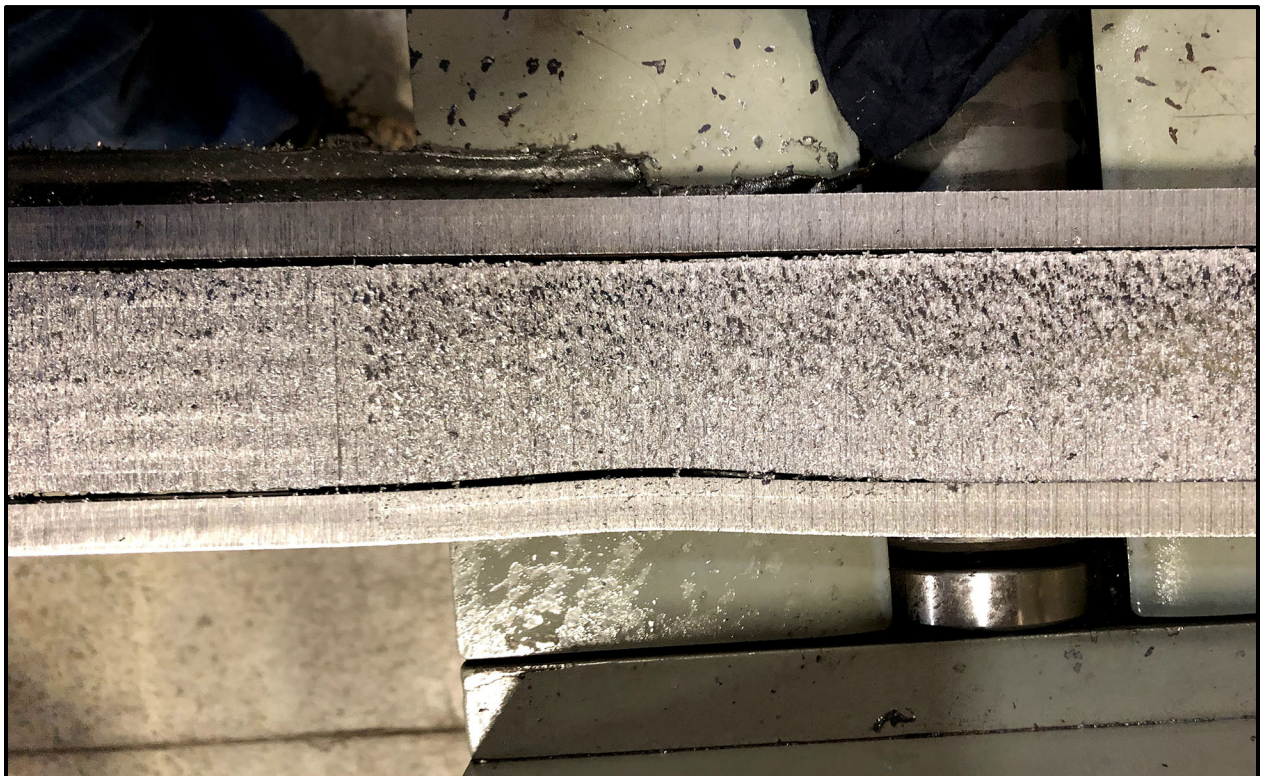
SC-55G2 18TU-10 Destructive Disassembly Cut AM/AN at Axial Elevation 13.5
